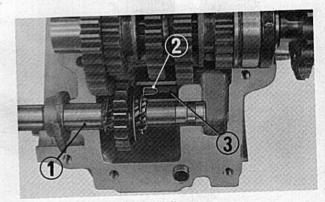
(1) Kick starter spindle (2) Friction spring
